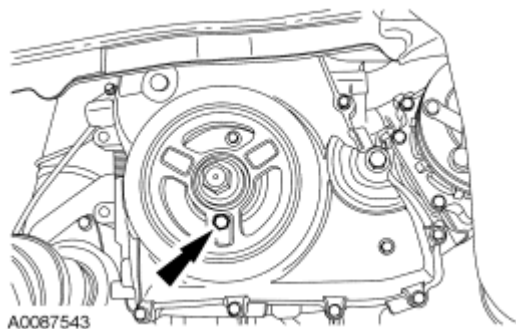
Aligning Crankshaft Pulley Bolt Holes
